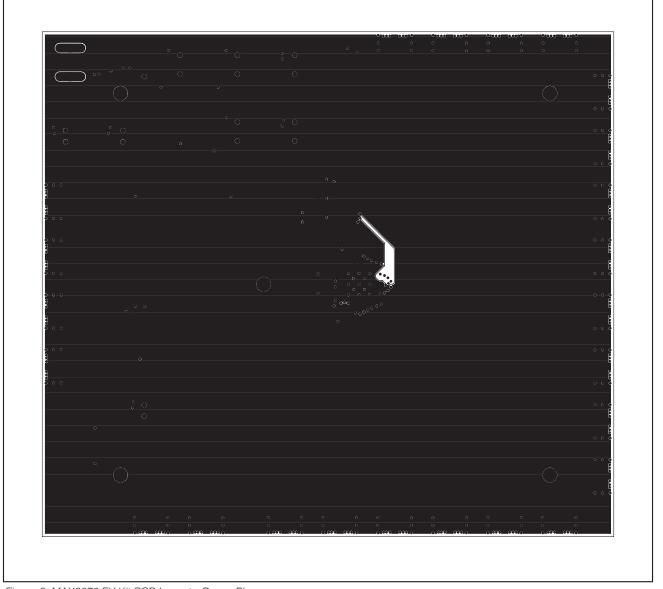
MAX3673 EV Kit PCB Layout—Power Plane
